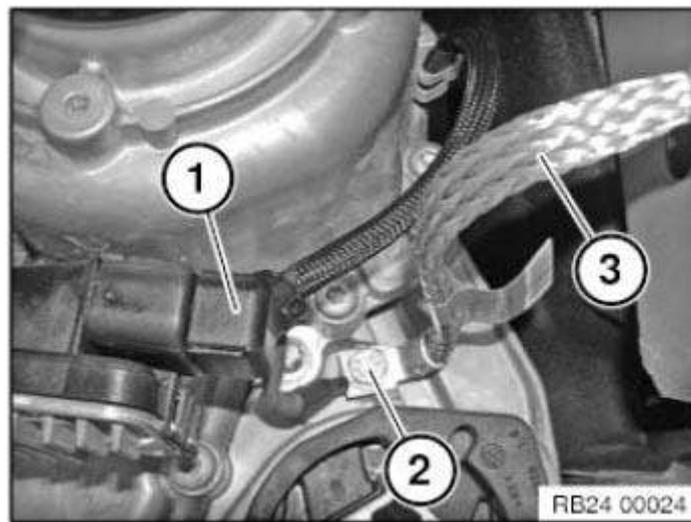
Identifying Transfer Box Control Unit Connector, Earth Strap And Screw
